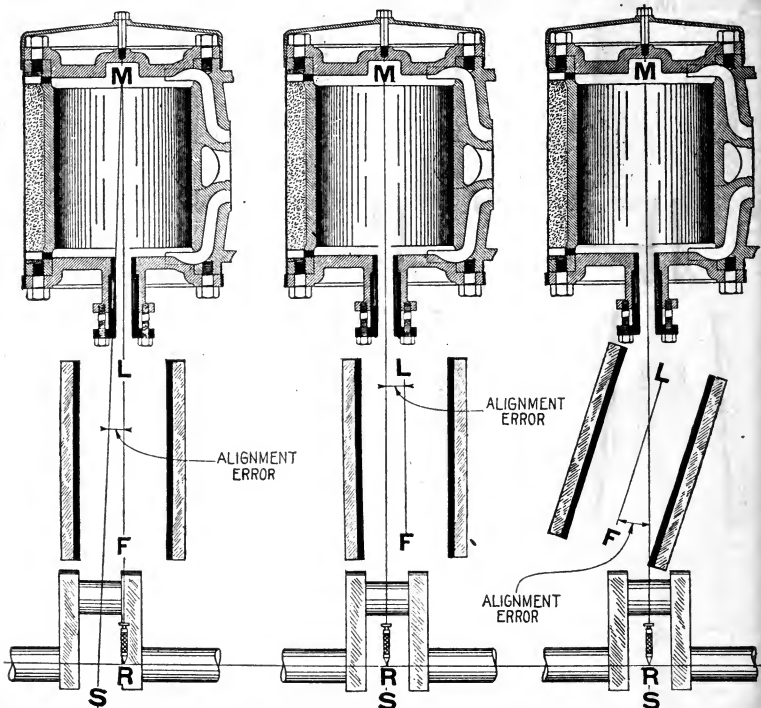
,154 to 2,156.—*Errors in alignment.* Fig. 2,154, *cross head guides not parallel.* Since only one gib of the cross head bears on the guide at a time, the tendency of the error is to cause the piston to bind at the cylinder ends, or if much out, to cause the cross head to bind at one end. Fig. 2,155, *one guide not parallel to cylinder axis.* Where adjustable flat guides are used as on some marine engines, an error in parallelism of one guide may be sometimes detected by faulty running in forward or reverse motion according to which guide be out of alignment. Fig. 2,156, *guides at different distances from cross head axis.* If the far guide be opposite the working gib it will cause *slapping*, that is a knock during admission. MS, cylinder axis; MR, plumb line through center of cylinder end.
